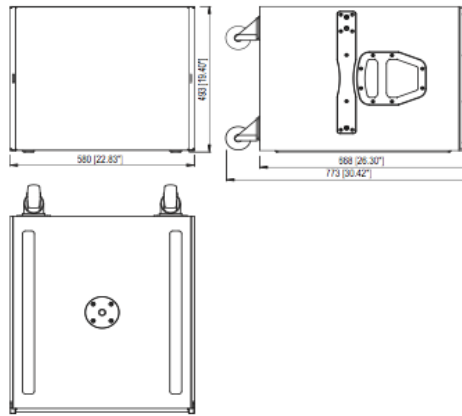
Q-SUB cabinet dimensions in mm [inch]
